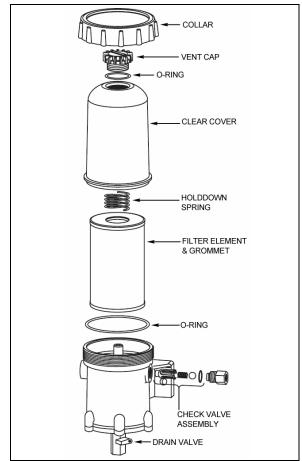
DAVCO FUEL PRO 382 EXPLODED VIEW03034
